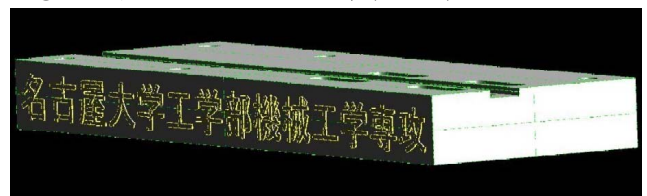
Character cutting is based on free design use of CAD/CAM Machining Center
